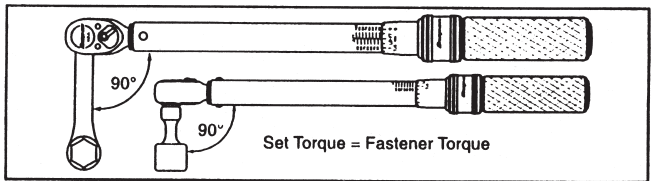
Using wobble extensions/ universals with torque wrenches.
